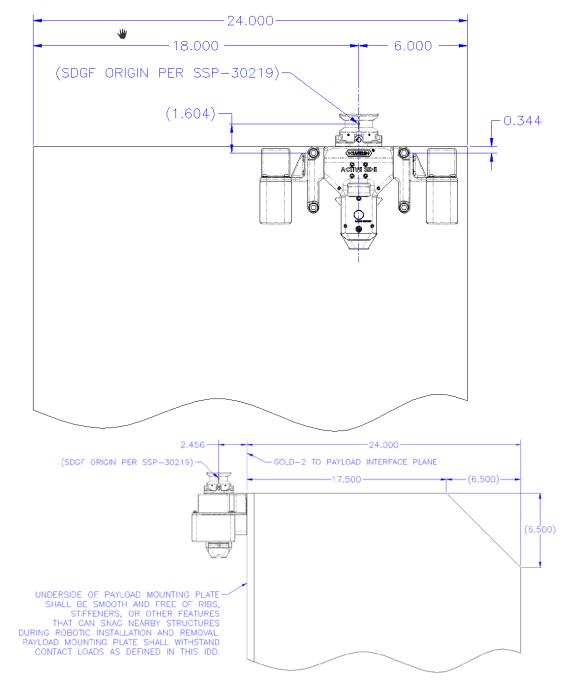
Location B GOLD-2 Installation Tolerance
